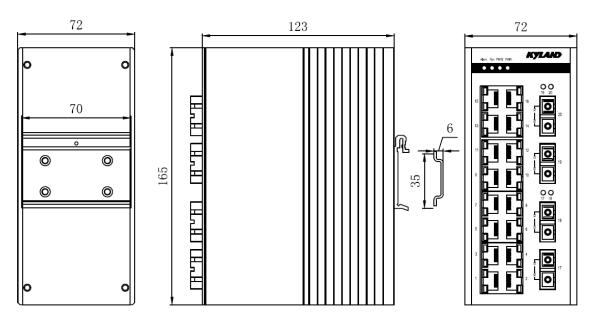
Dimensions for DIN-Rail Mounting (unit: mm)
